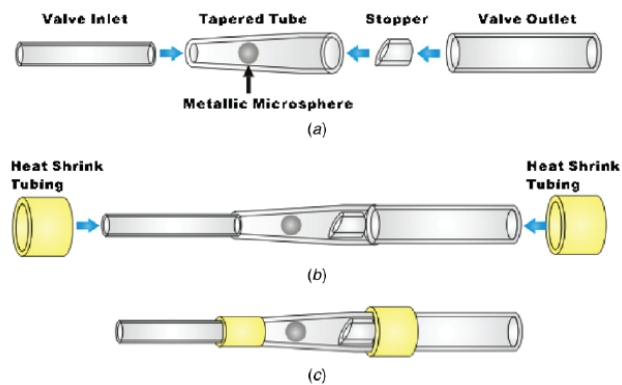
Illustration of (a) basic components, (b) assembling process and (c) final packaging of the micro-ball valve (not to scale)<sup>12</sup>.
